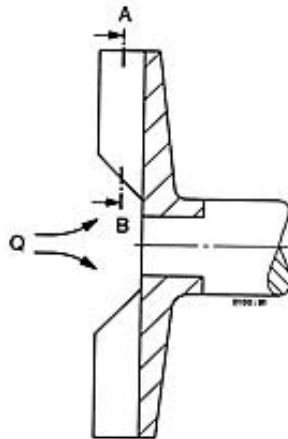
Meridian section through a radial impeller (longitudinal section through pump shaft)
